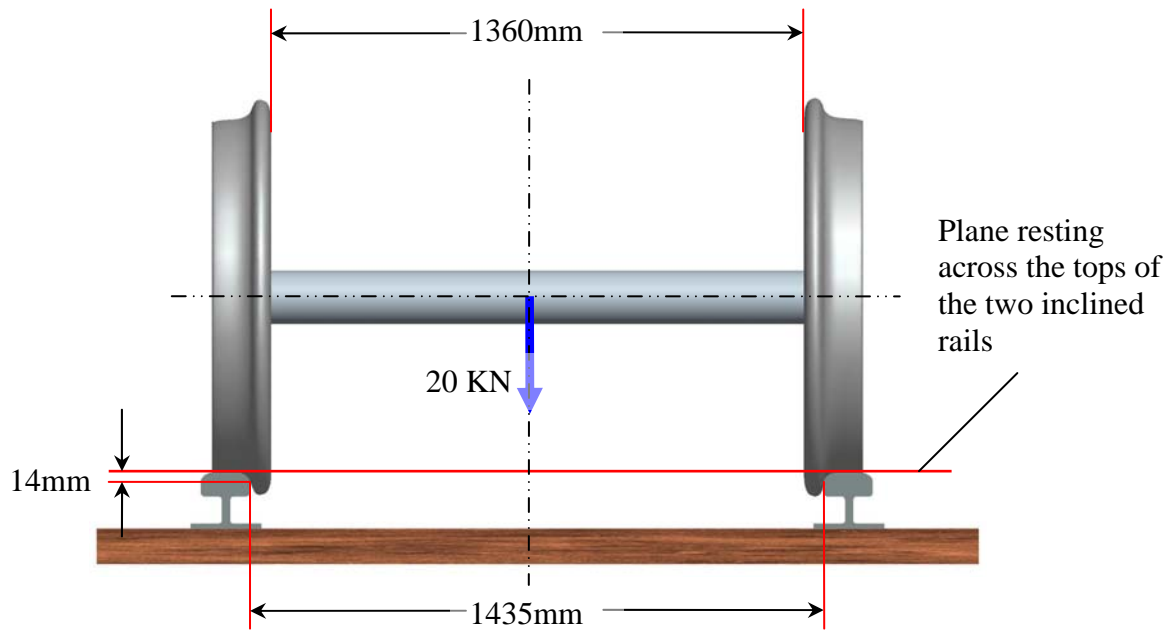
Showing the gauge and flange-back dimensions and the positioning of the vertical load
